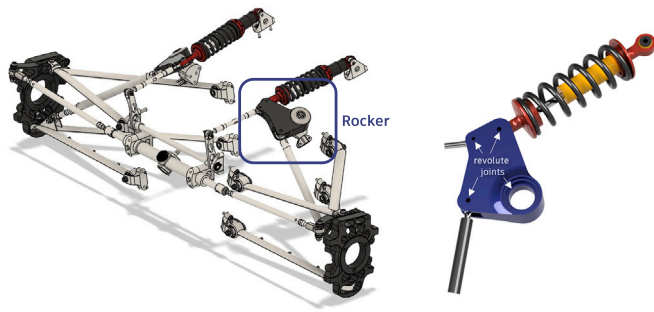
Vehicle suspension assembly. Left: full assembly. Right: rocker detail with interfaces. Image courtesy of Andy Harris, Autodesk.
